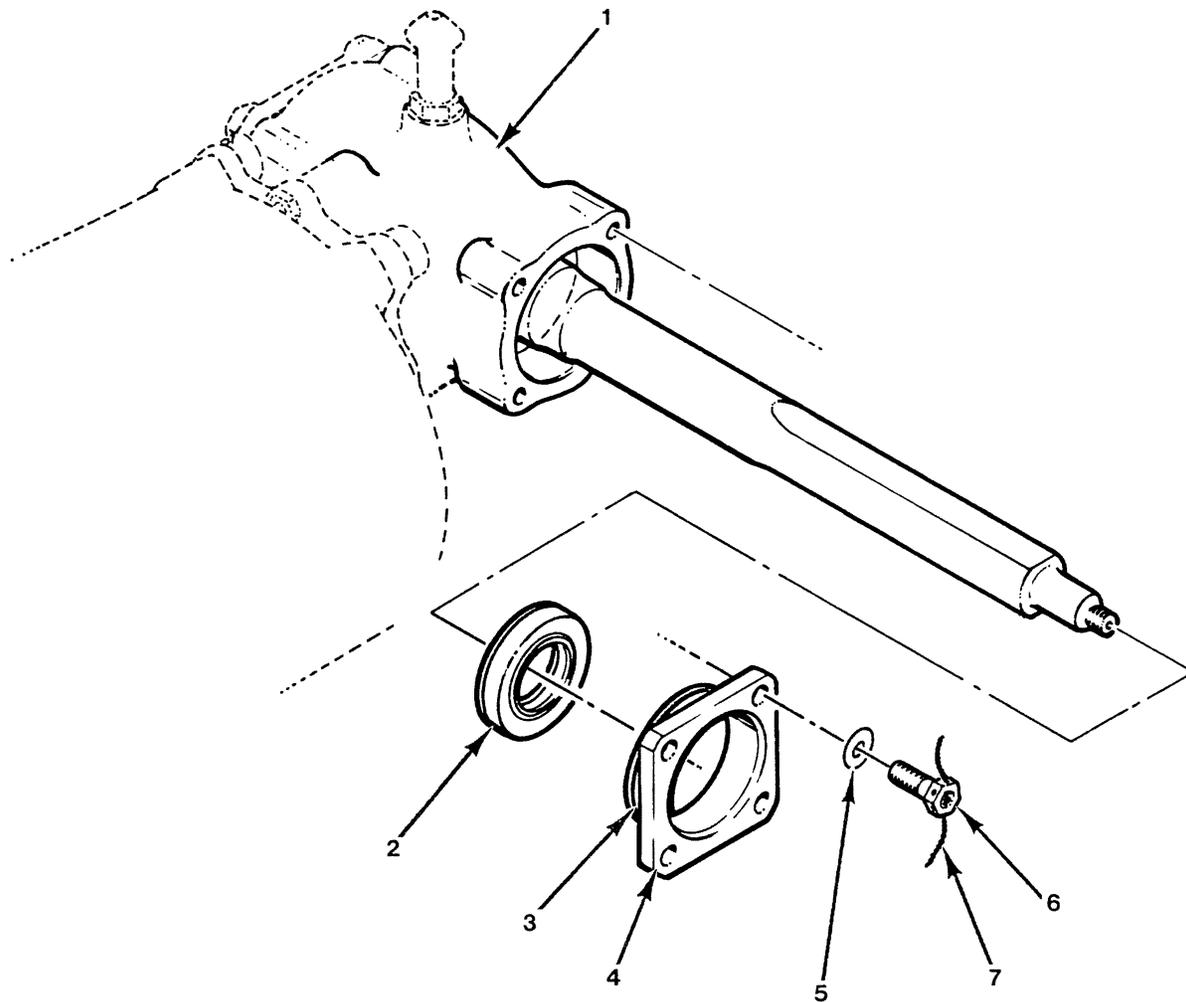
TAIL ROTOR GEARBOX OUTPUT SHAFT SEAL REPLACEMENT
